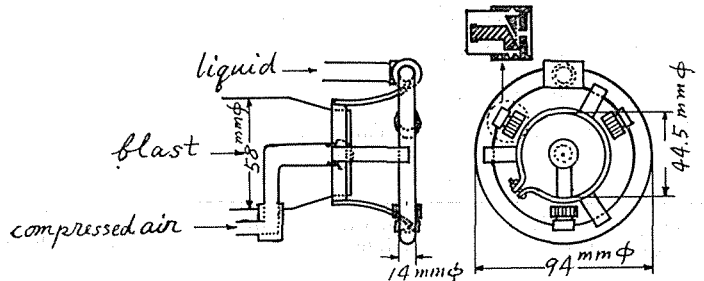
Dimensions of nozzle parts of knapsack type mistsprayer.
